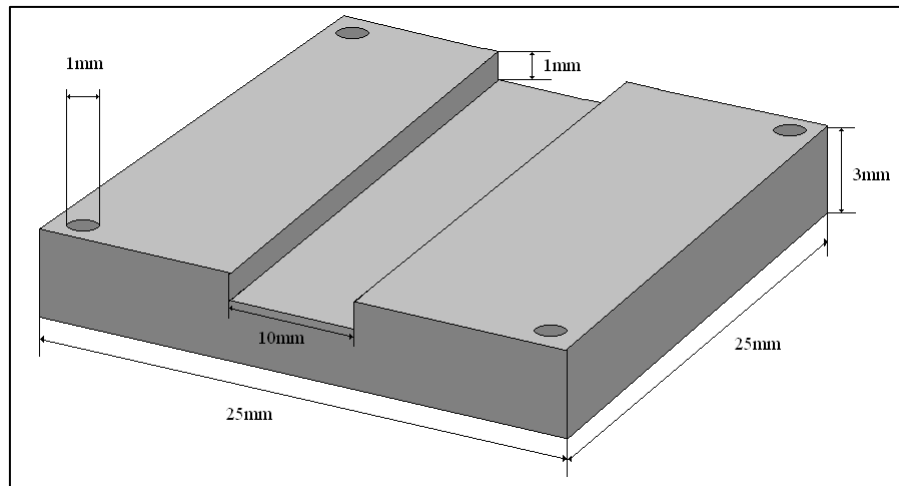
Schematic illustration indicating the dimensions of the top-hat end tab.
